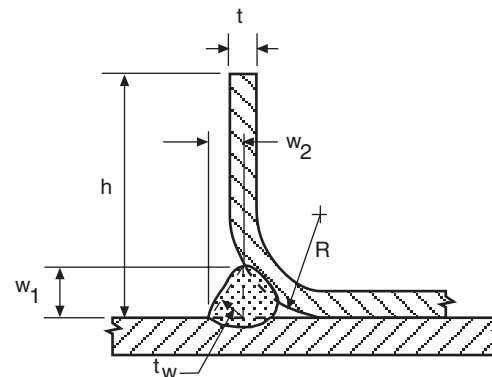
Flare Bevel Groove Weld
